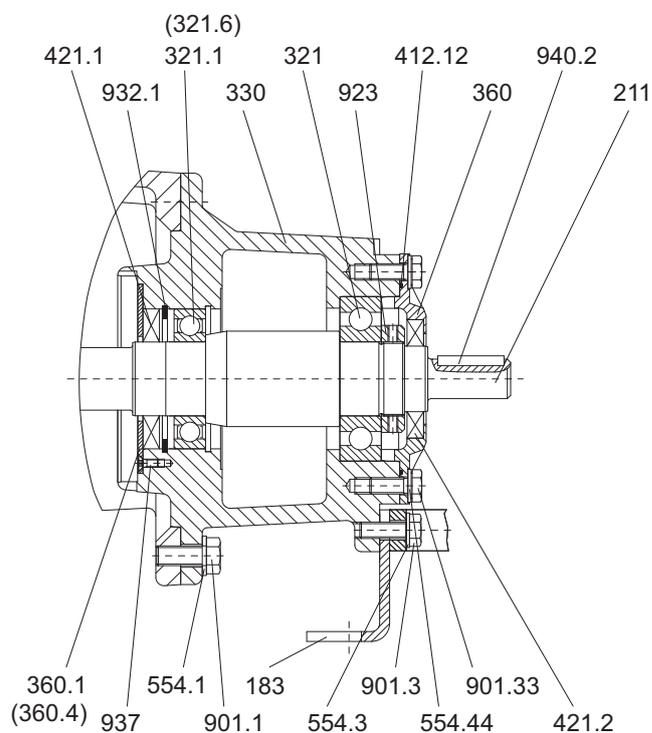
Bearing bracket (grease-lubricated bearing, lifetime lubrication)
